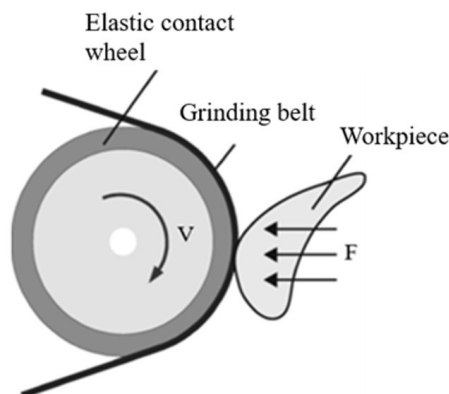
Sketch of a typical belt surface grinding system [5].
